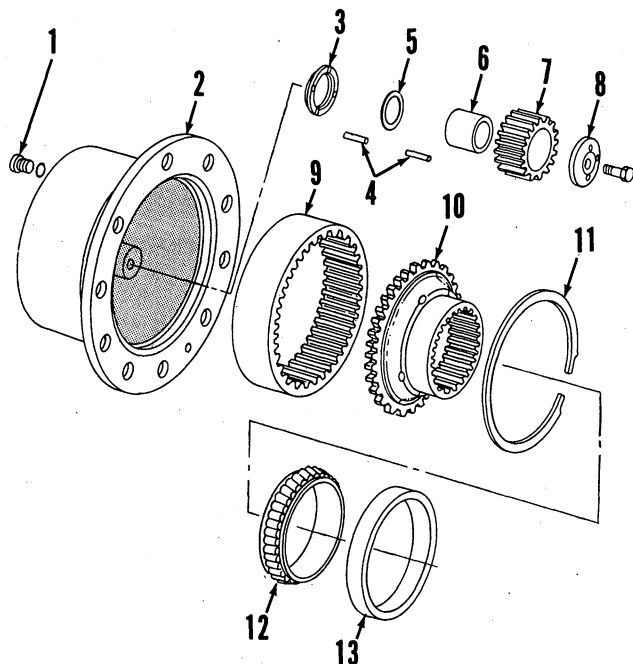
Exploded view of front-wheel drive axle planetary assembly.
